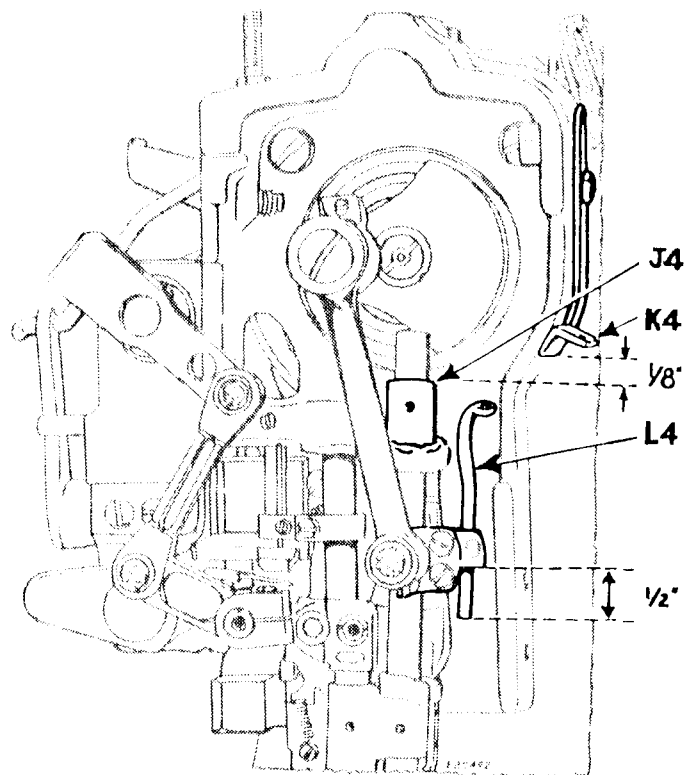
Adjustment of Needle Thread Take-up and Loop Setting Eyelet
